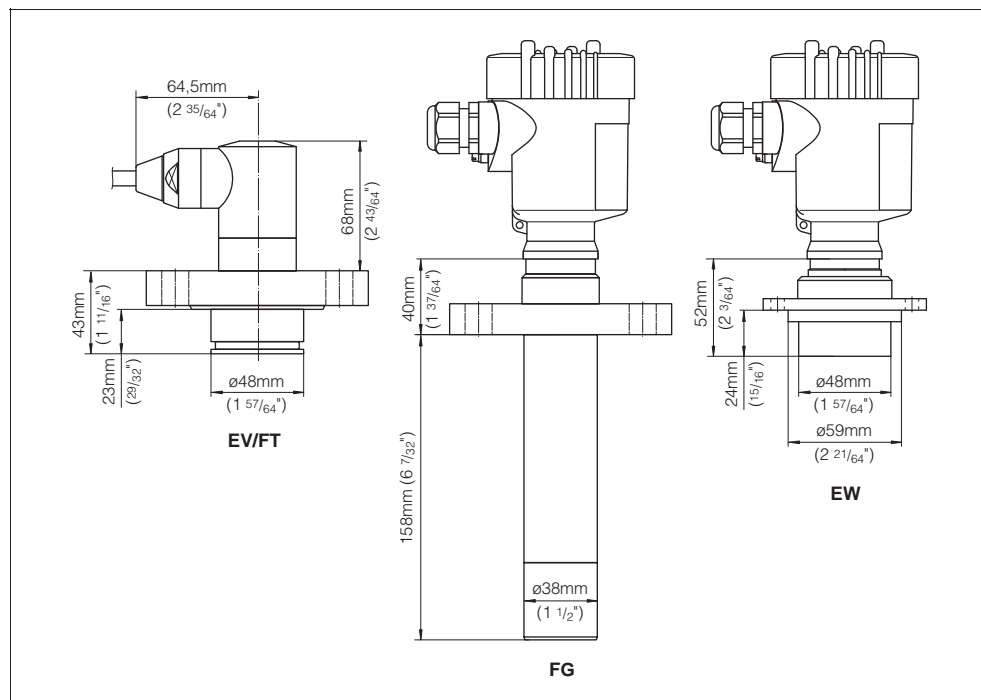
VEGABAR 64, extension fitting for paper industry: EV/FT = absolutely flush for pulper (EV 2-times flattened), FG = extension for ball valve fitting, EW = flange for manometer lug
